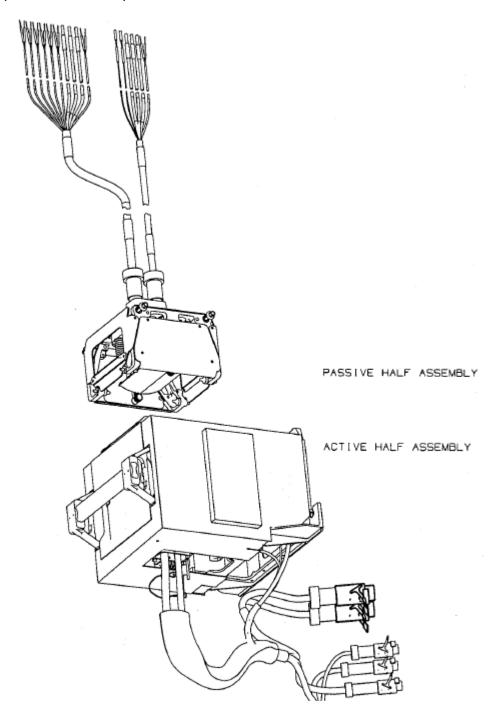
UMBILICAL MECHANISM ASSEMBLY
